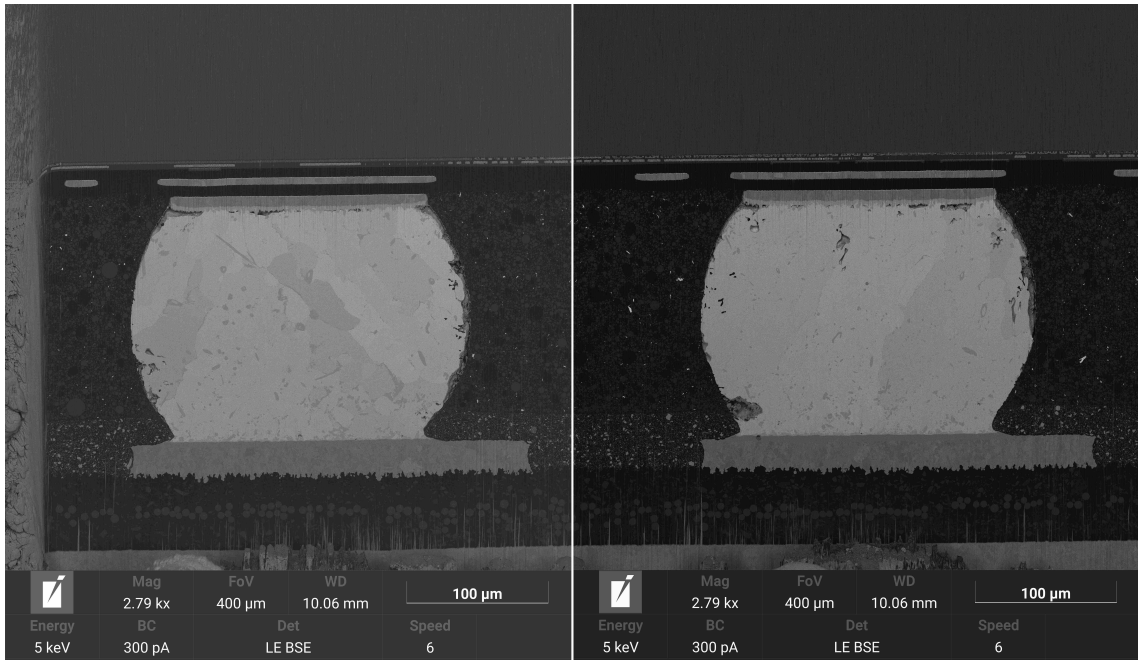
Detailed view on both solder balls in the internal structure of the flip chip. Individual layers can be seen in both images – solder pads, chip structure, underfill, non-soldering mask, PCB etc.
